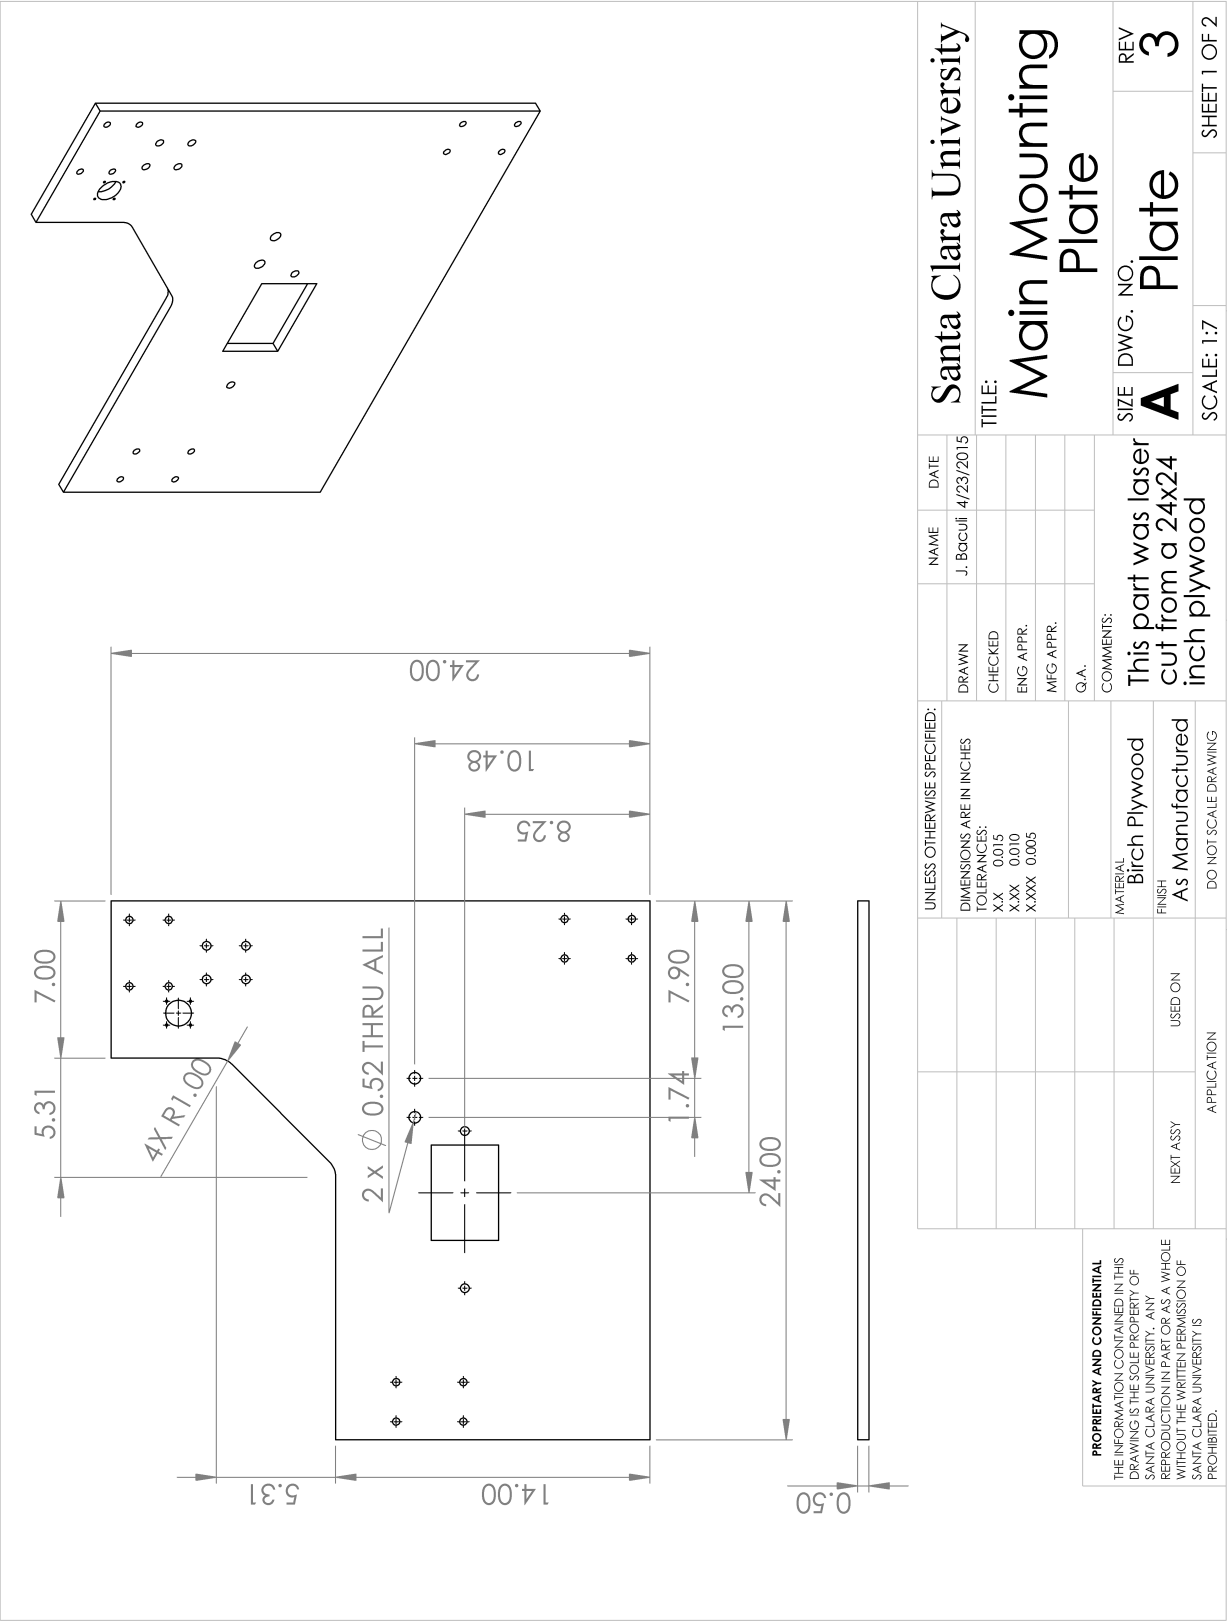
Mounting plate that contains the cutting head, sensor arm assembly, caster wheels, and linear actuator arm. This sheet shows the overall dimensions of the part and the location of the linear actuator mount.
